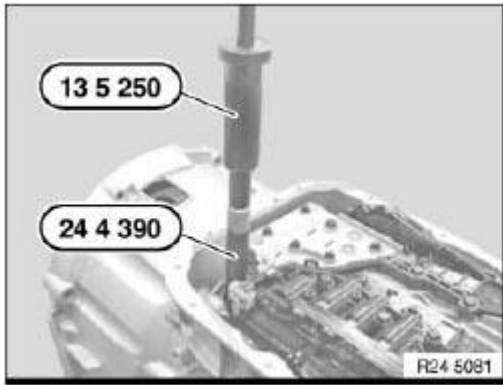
Identifying Special Tools (13 5 250 And 24 4 390)
